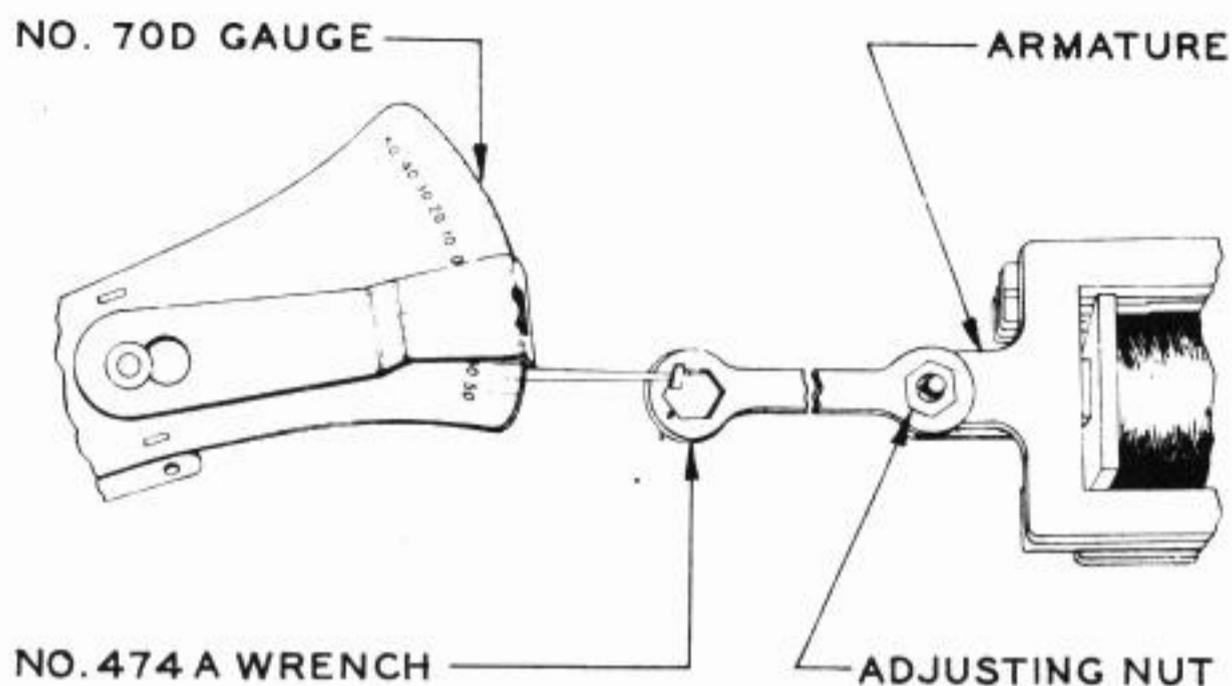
METHOD OF CHECKING TIGHTNESS OF ADJUSTING NUT
